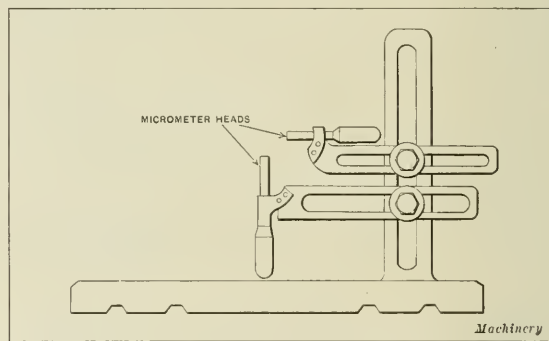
Measuring Tool used with Bars B and C for testing Alignment of Headstock and Tailstock
